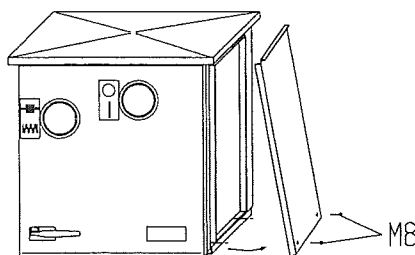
a: Removing the side panel from the mechanism.
